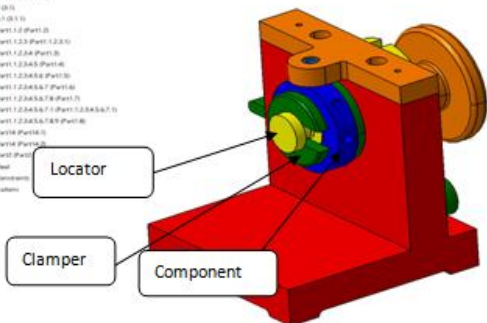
3d model of complete assembly of indexing jig in isometric front view
